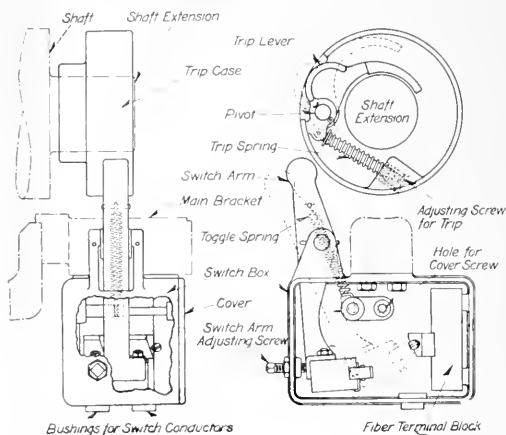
Assembly Drawing of the Overspeed Limit Device.
